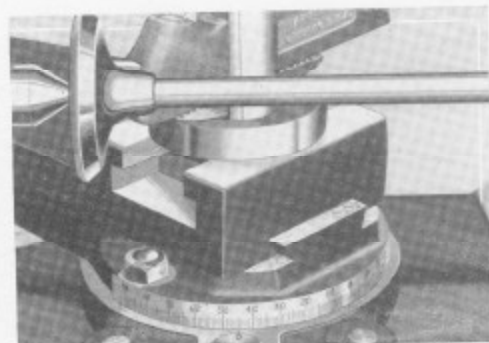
Close-Up of Compound Rest of Lathe at 45 Degree Angle for Refacing Valves
